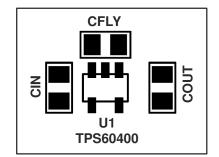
Recommended PCB Layout for TPS6040x (Top Layer)
